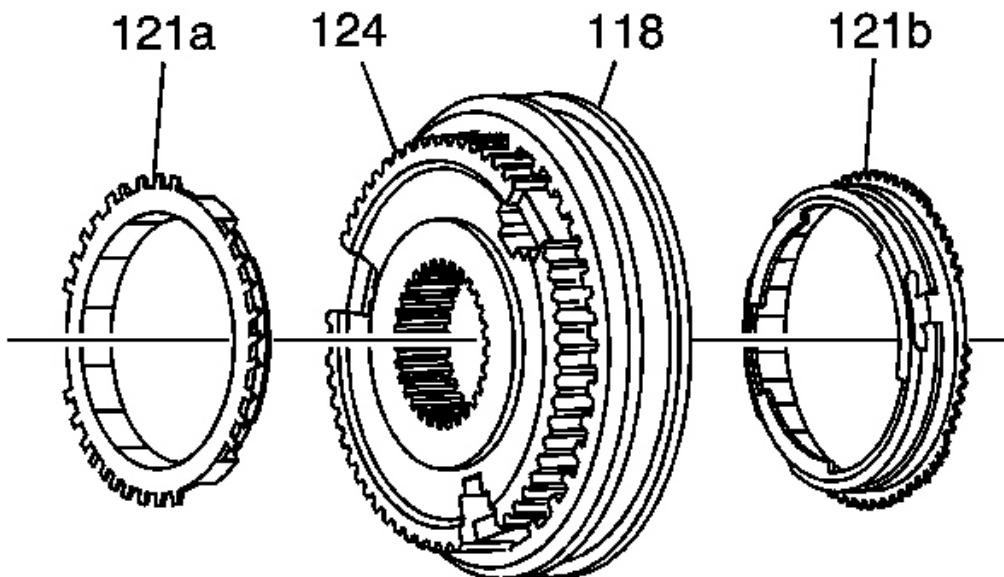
View Of 5th/6th Synchronizer Hub & Blocking Rings
